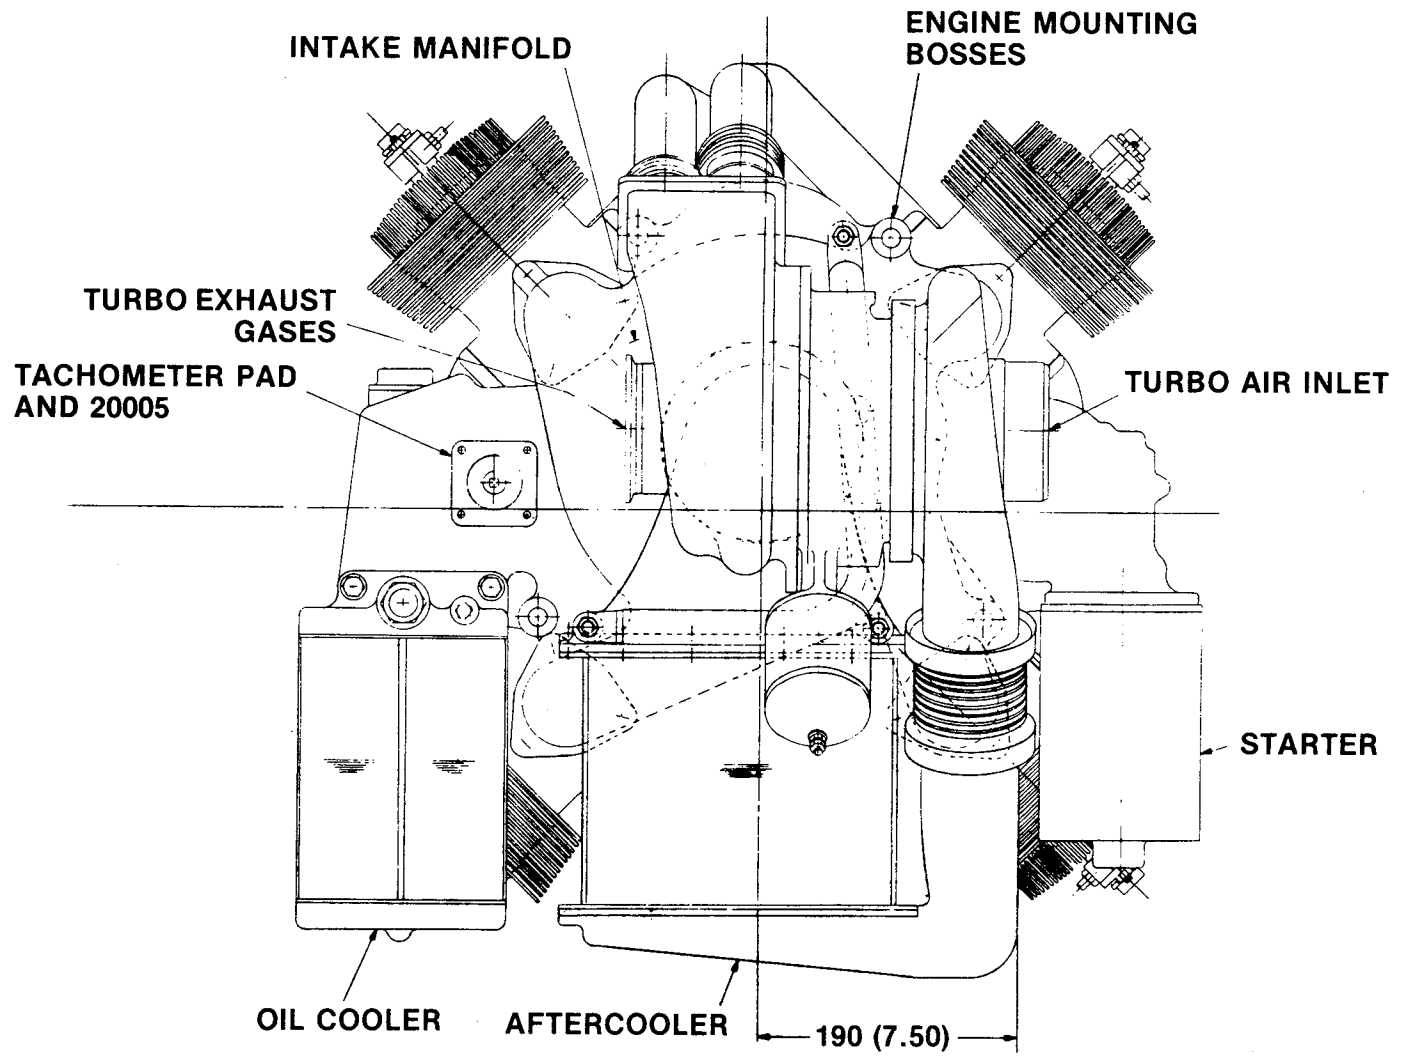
149 kW AIRCRAFT DIESEL—REAR VIEW
